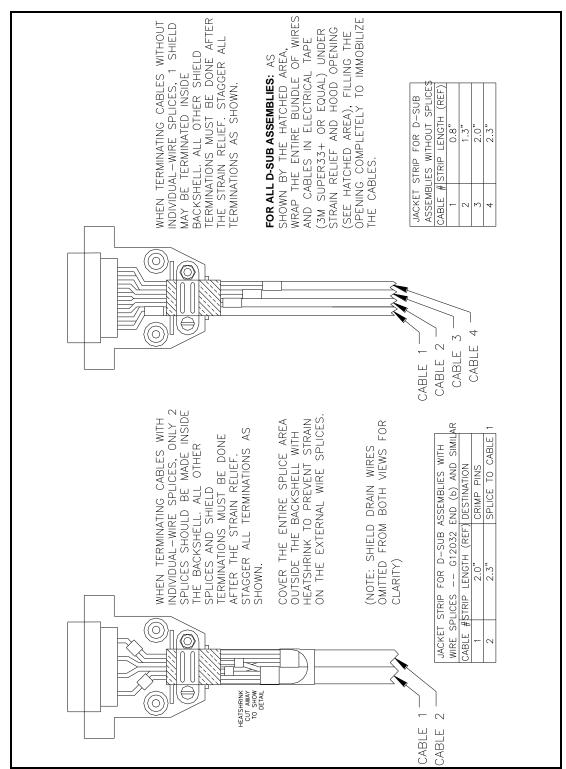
Cable Assembly Detail Spice and Shield Staggering
